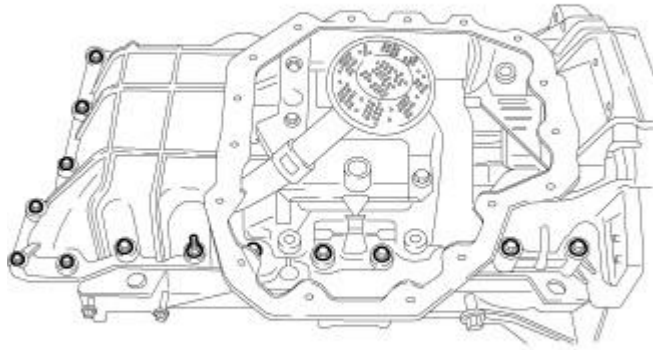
Lower Oil Pan, Upper Oil Pan & Bolts
